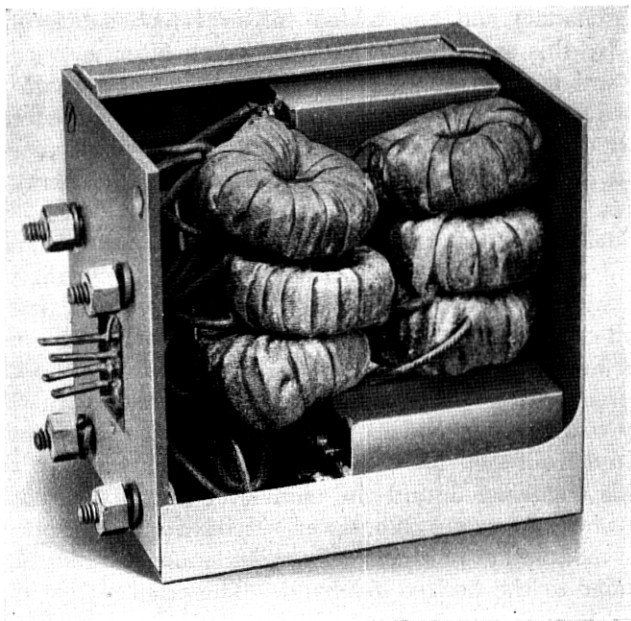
Filter (with cover cut away) showing general method of assembly.
